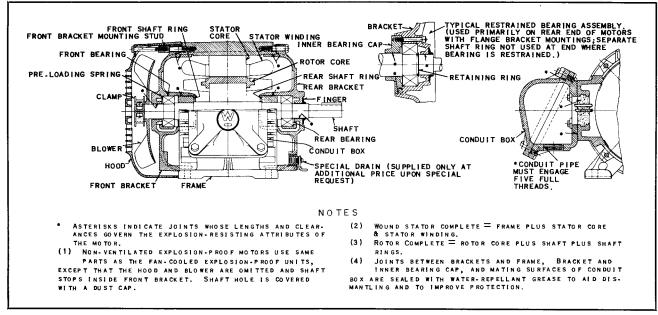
Arrangement of Parts, Totally Enclosed Fan-Cooled Explosion-Proof Type "A" Life-Line Motors
